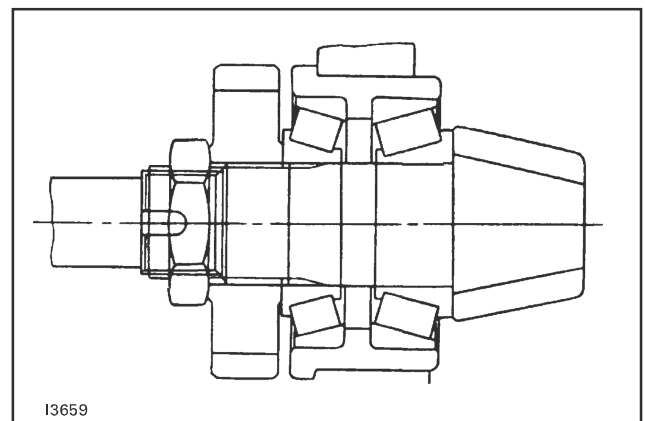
A-64: Remove bolts holding pinion with bearings as an assembly.
